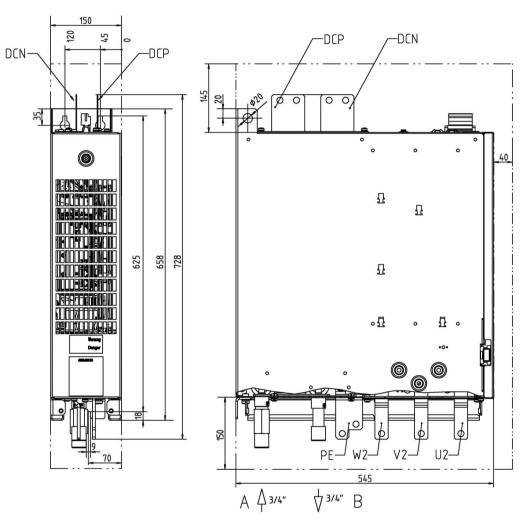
Dimension drawing Motor Module, frame size FXL. Front view, side view
